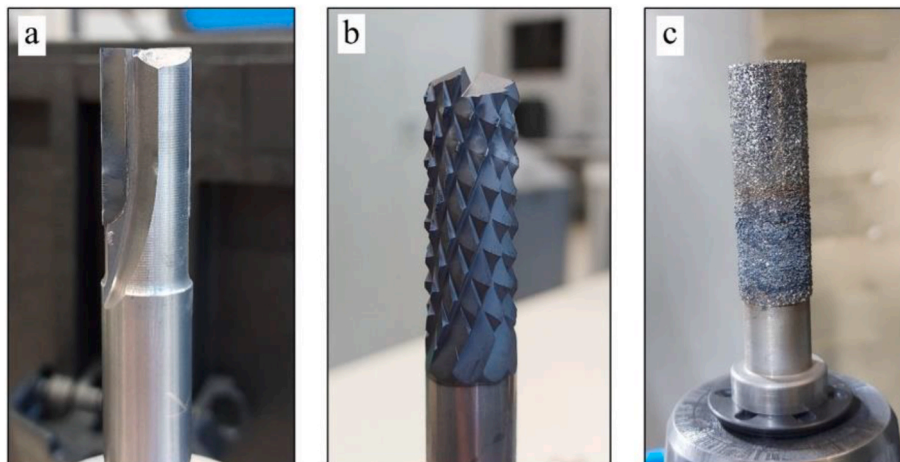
Tested peripheral milling tools: double-edged PCD cutter (a) and router (b) of defined geometry, grinding pin (c).
